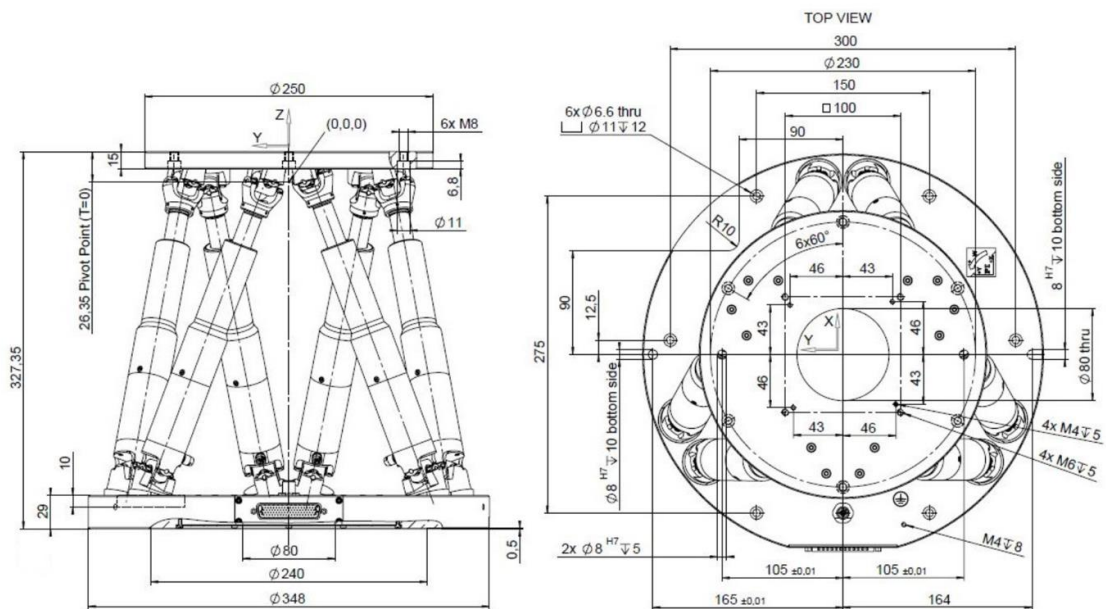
Hexapod H840.D2 technical Drawing [213]
